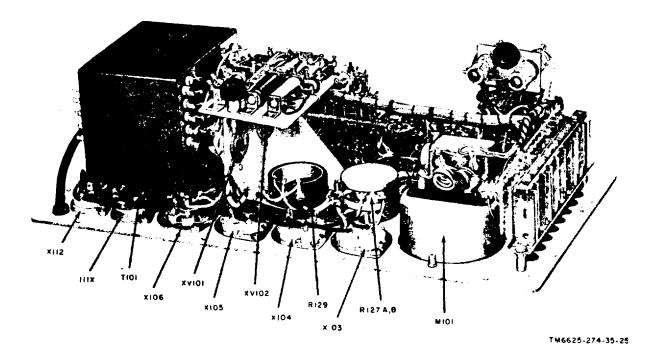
Test Set, Electron Tube TV-7/U, tubes removed, rear-right oblique.
